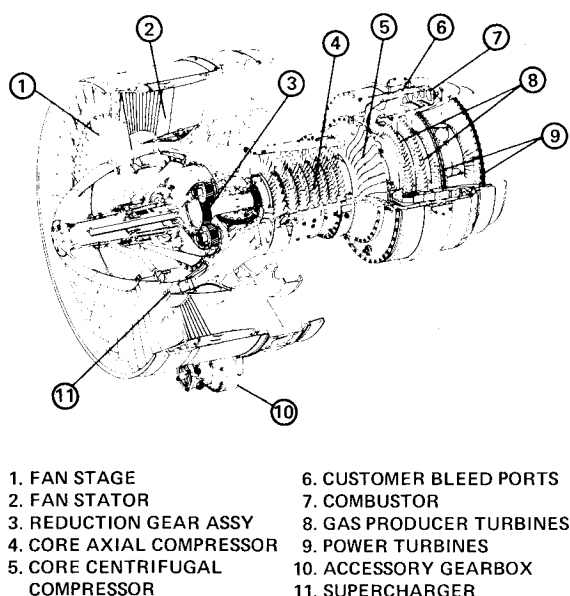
Cutaway view of the YF-102 (QSRA) engine.
